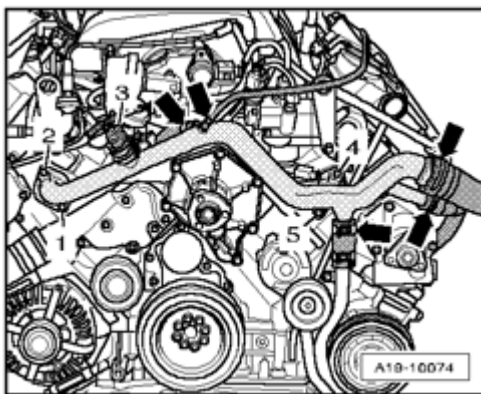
Disconnecting Coolant Hoses From Front Coolant Pipe
